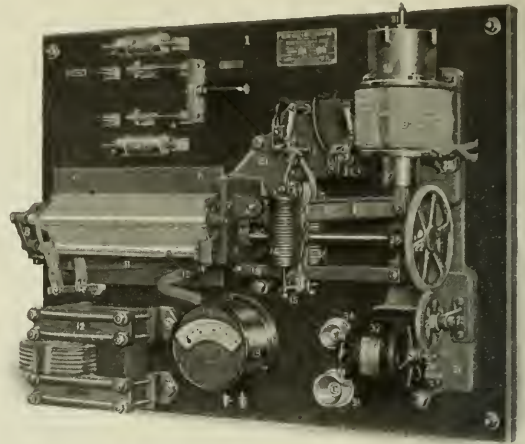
(1) Slate Panel; (2) Double-throw Switch; (3) 300-ampere Fuse; (4) Switch Receptacle; (5) Carbon File; (9) Back End Disk Cable; (10) Front End Disk Cable; (11) Asbestos Board; (12) Choke Coil; (13) Ammeter; (19) Toggle Circuit Breakers; (27) Solenoid Plunger; (28) Solenoid Casting; (29) Solenoid; (30) Dash Pot; (31) Piston-rod to Dash Pot; (32) 1/10-horsepower Motor; (33) Welding Circuit Plug; (34) Control Circuit Plug
